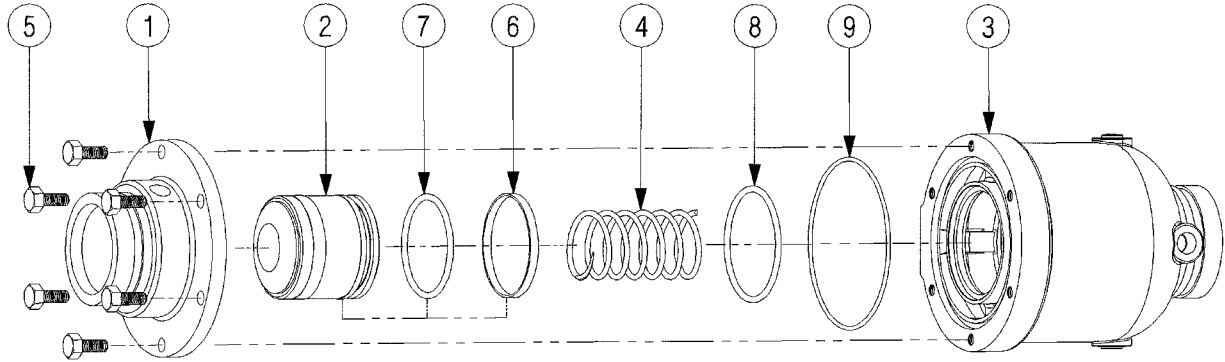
Daniel Control Valves Series 600 Exploded Assembly
